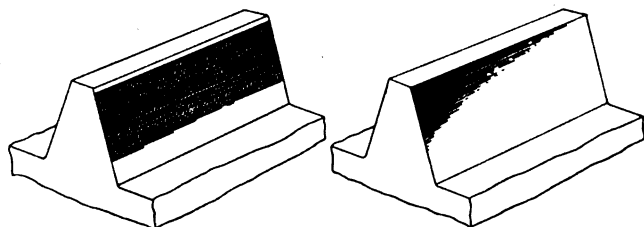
A Correct Bearing FIG. 14 Move Pinion toward Gear, and move Gear toward Pinion
